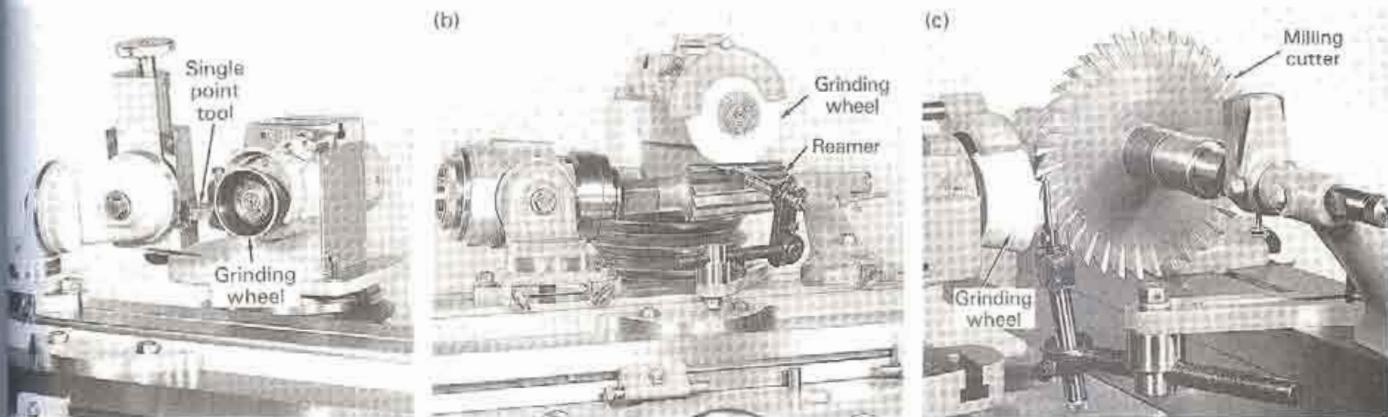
Three typical setups for grinding single- and multiple-edge tools on a universal tool and cutter grinder. (a) Single-point tool is held in a device that permits all possible angles to be ground. (b) Edges of a large hand reamer are being ground. (c) Milling cutter is sharpened with a cupped grinding wheel.
